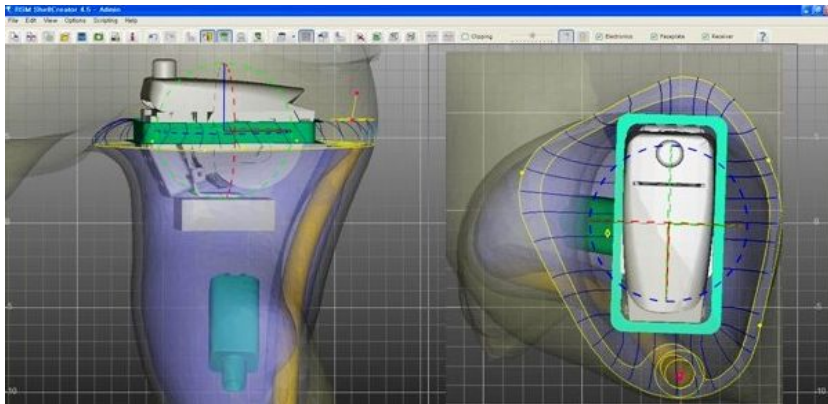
7 modify the shell according to the inside components. Making good use of the inside space, and make the hearing aid shell minimized and customized.
